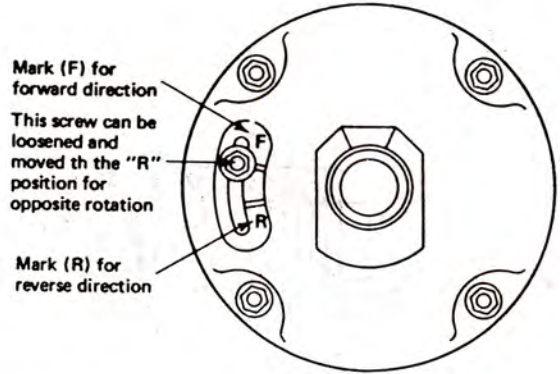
An end plate showing how the brush holder is moved to reverse the motor.
